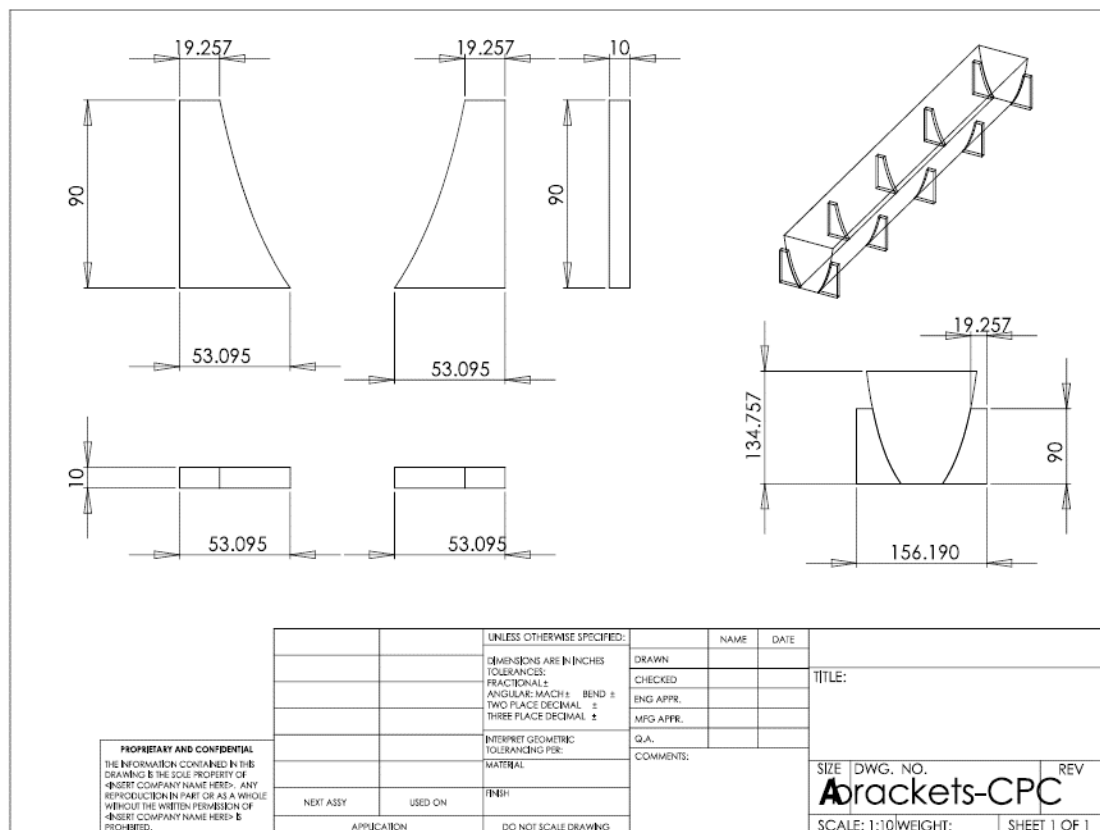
Plan assembled original truncated SRCPC CAD drawing showing a concentrator with supported brackets stands having dimensions at installation
